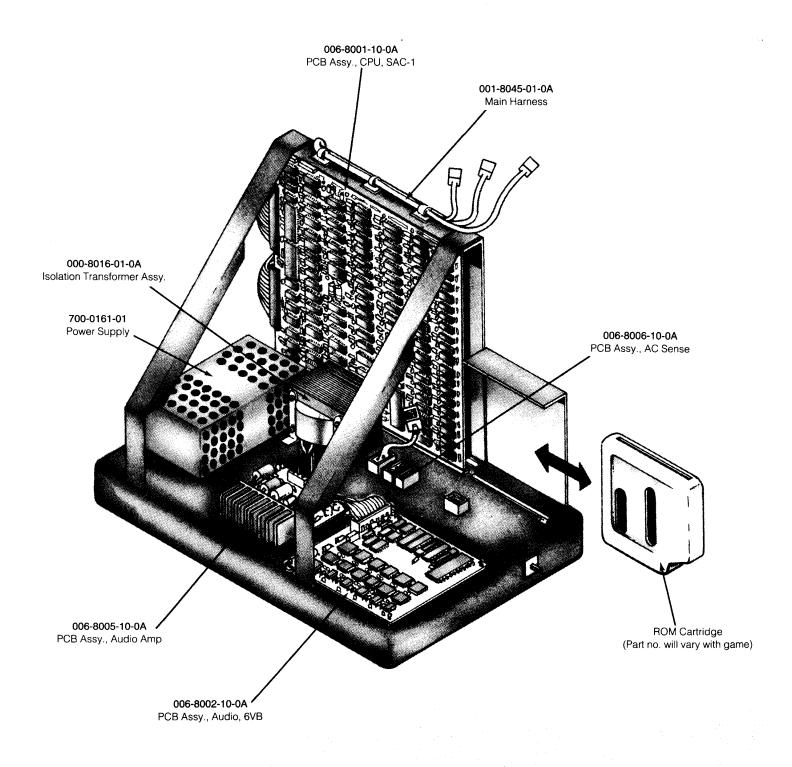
Electronic Chassis Assembly (000-6011-10-0A)
